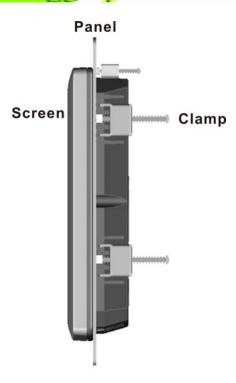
Tighten the Panel Mounting Clamp Screws
